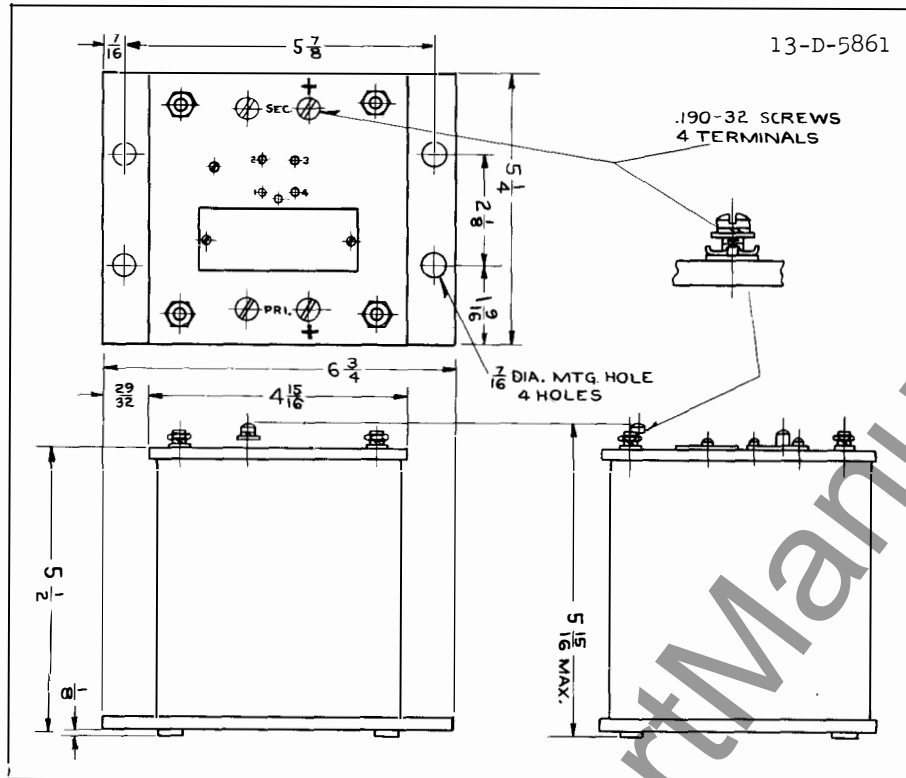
Outline And Drilling Plan Of The Type HKB Test Transformer. For Reference Only.
